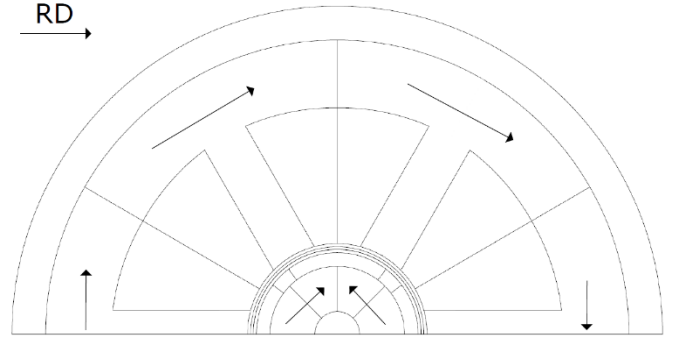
Segmented Synchronous Machine. The arrows indicate the rolling direction of the steel sheets / segments.
